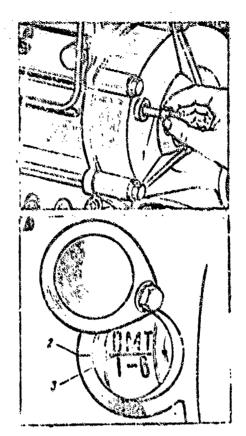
Method of setting piston of first cylinder at top dead center:
